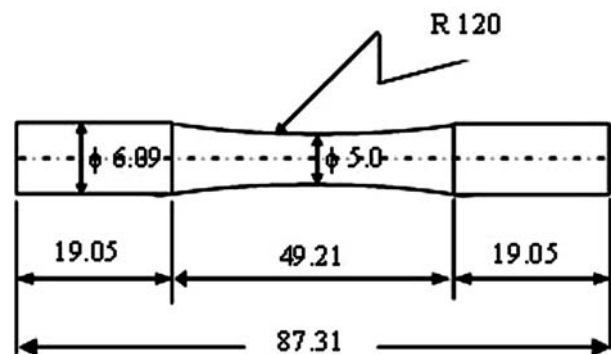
Rotating bending fatigue specimens (dimensions in mm)
